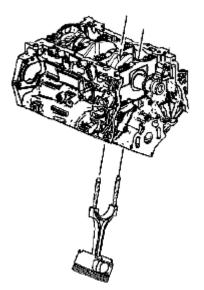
Identifying Special Tool EN 46121 Courtesy of SUZUKI OF AMERICA CORP.
